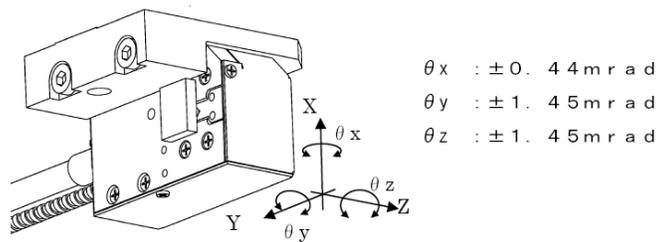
Definition of encoder head axis and rotational tolerance
